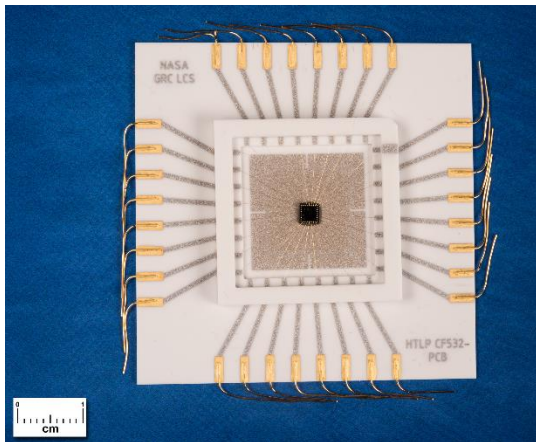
A test assembly of a packaged SiC JFET integrated circuit chip mounted on a co-fired Pt/92% alumina PCB.
